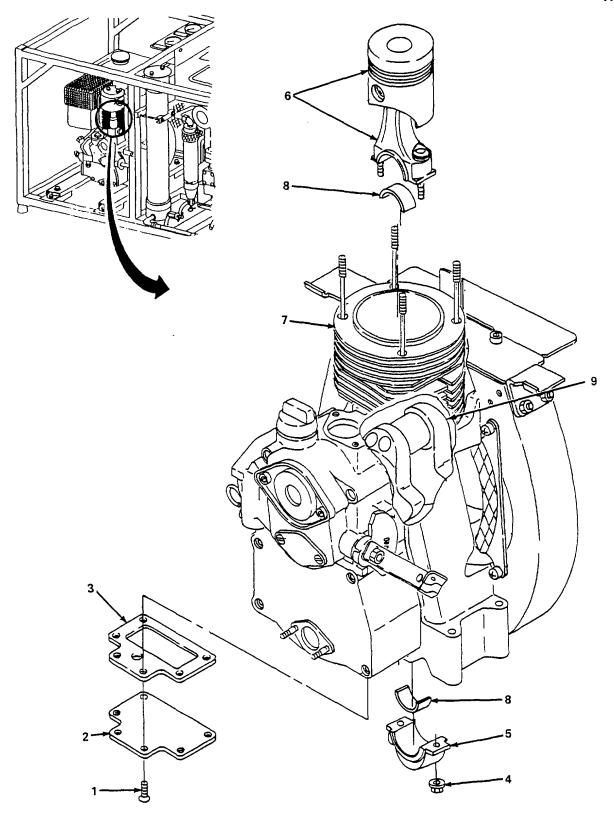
Piston and Connecting Rod Assemblies, Replace. 6-55
